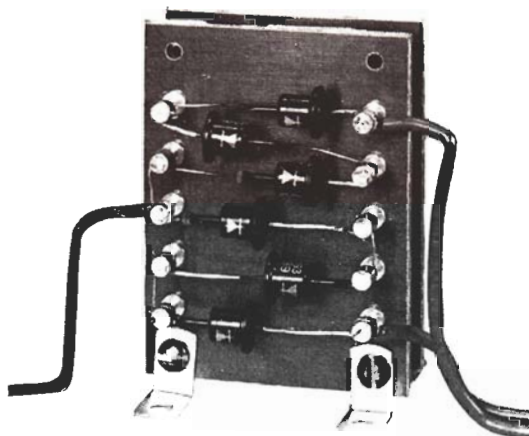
View showing a suggested mounting arrangement for a group of lead-mounted germanium or silicon rectifiers on terminal boards. The boards were fastened together with bolts and spacers, then mounted on the chassis with small angle brackets.
